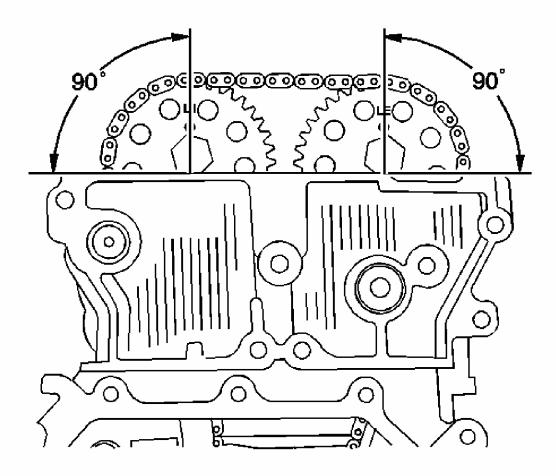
Ensuring Camshaft Sprocket Drive Pins Are At The Top Of Their Rotation
